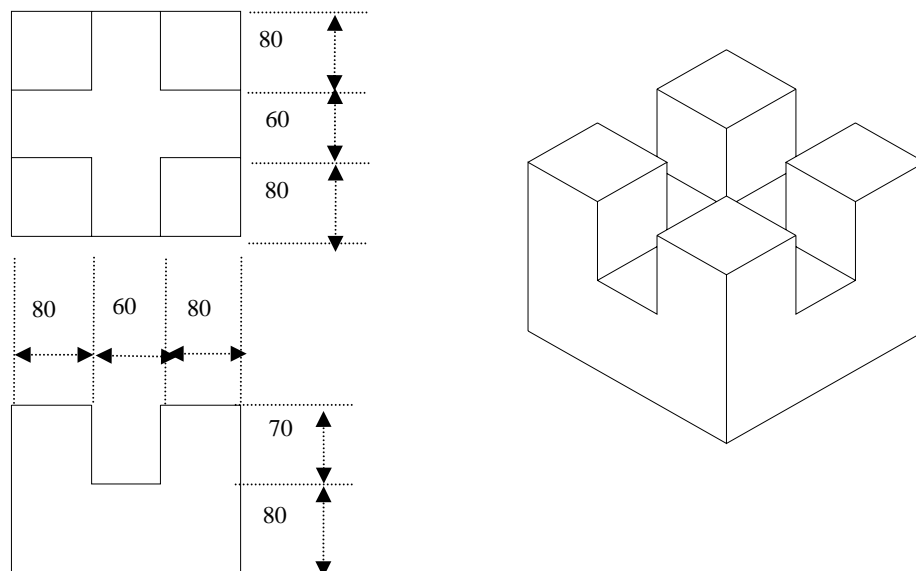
Test specimen dimensions of Part 9 (in mm)
